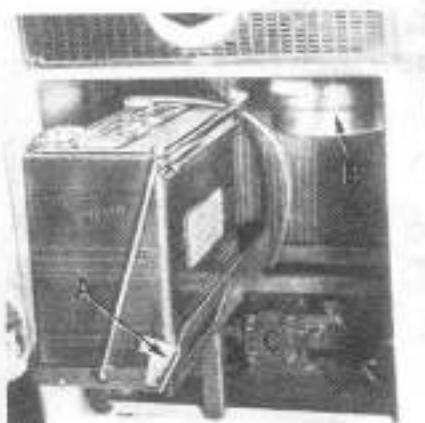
On Models 1210, 1212, 1410 and 1412, the hydraulic pump (C) is accessible after removing grille and swinging battery tray outward. Oil cleaner is (B); battery tray latch is (A).
